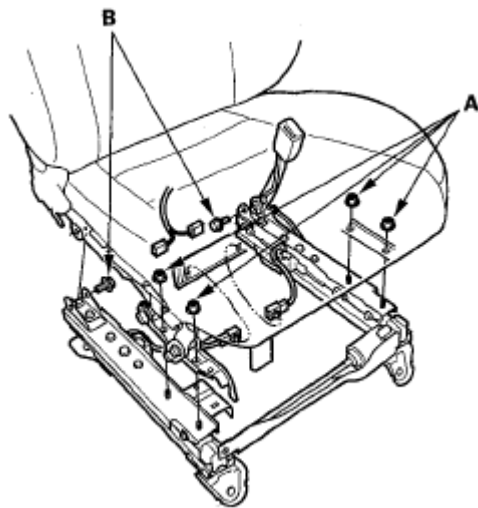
Identifying Front Passenger's Weight Sensors Mounting Nuts And Mounting Bolts Under Seat Cushion
